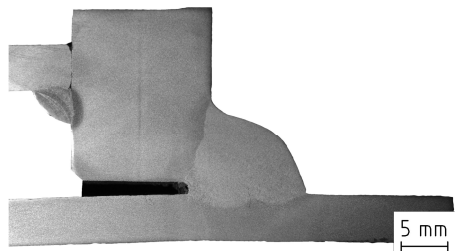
Macrograph of fillet weld joint between cylindrical part of the sleeve and pipe.
